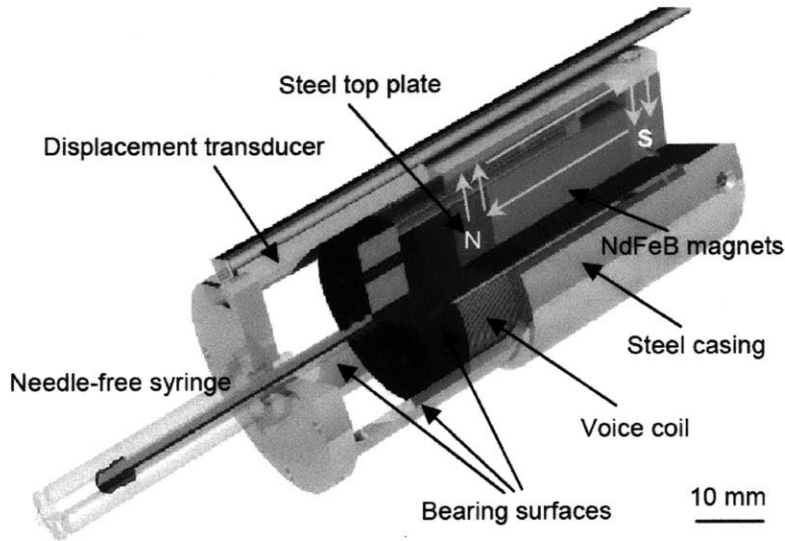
Cutaway view of the jet injector, taken from A. Taberner et al. [6].
